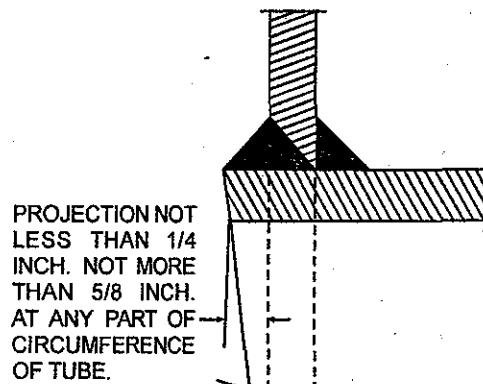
FUSION WELDS OF CROSS TUBES
